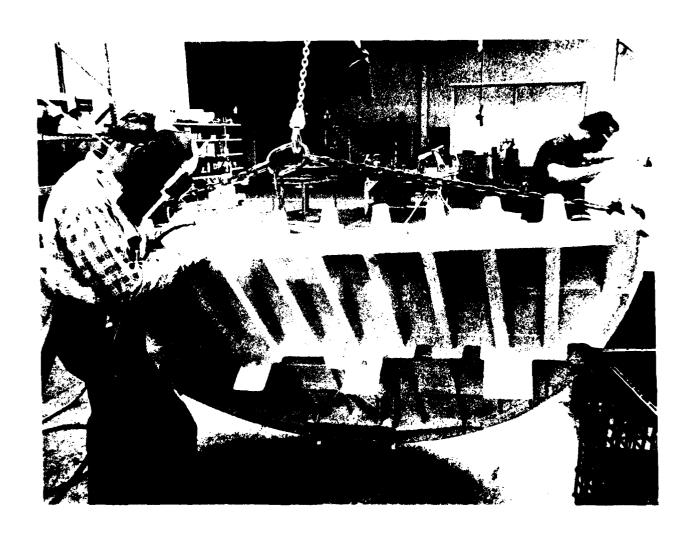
Weld Correction - Aft Side View of Bulkhead Casting
